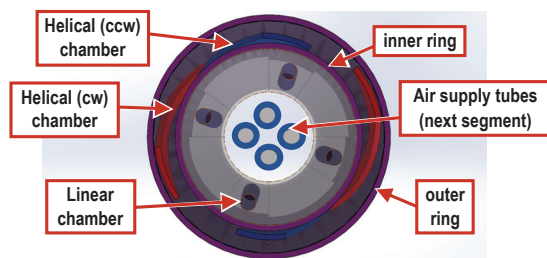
Section view of the second (mid) segment, as seen when looking from the base of the arm towards its tip, showing the arrangement of the different arm design elements.
